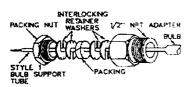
Part Number FTG13A-600R packing nut assembly. (Use with Style 1 bulb with support tube for direct immersion applications.)
